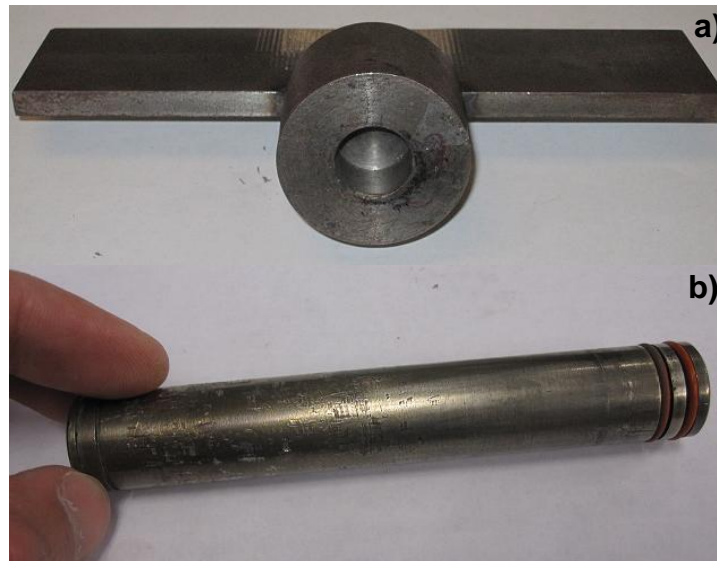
a) Piston holder and; b) Piston with silicone O-rings.
